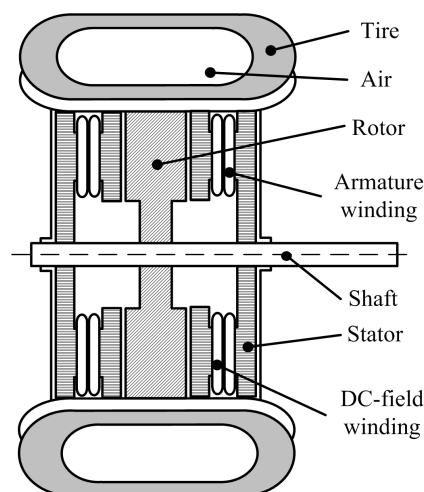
shows the topology of the proposed 8/10-pole AF-DSDC machine, which consists of a double-sided-stator sandwiched-rotor structure. The stator and rotor construction of the proposed machine are similar to those of other conventional AF machines [23].
